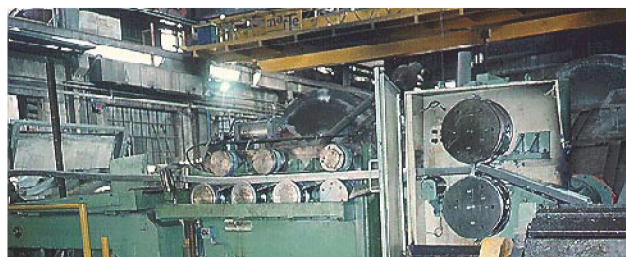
Rotary shear used on Properzi wheel and belt ingot caster [23].
